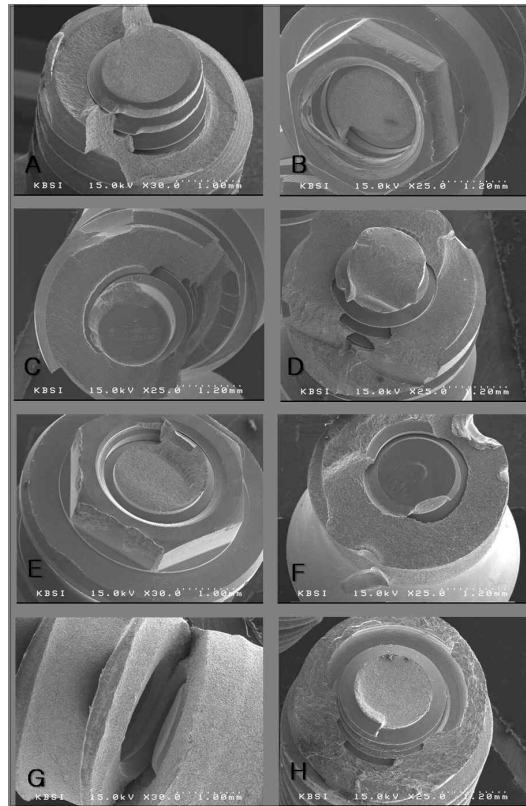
SEM photograph of failures during endurance limit test (original magnification  $\times 25$  or  $\times 30$ ). A, Fixture and abutment screw fracture in group BJT. B, Abutment screw fracture in group BJT. C, Fixture fracture in BJS. D, Fixture and abutment screw fracture in group BJS. E, Fixture crack and abutment screw fracture in group BJS. F, Fixture fracture in group CJO. G, Fixture crack in group CJO. H, Implant and abutment screw fracture in group CJT.
